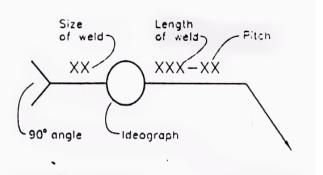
The welding symbol. Usually it is modified to a simpler form for use on drawing
